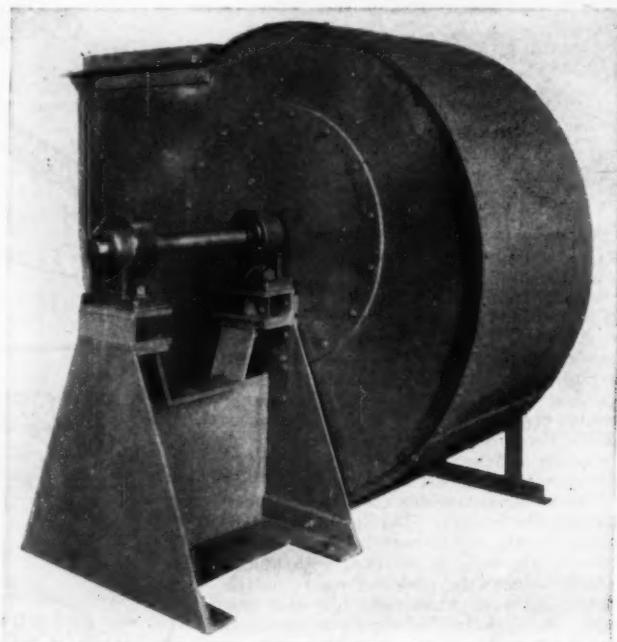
Complete blower unit. Shows all-welded drive shaft base and suction intake. Cast base cost 15¢ per pound. Welded steel base cost 12¢ per pound.
